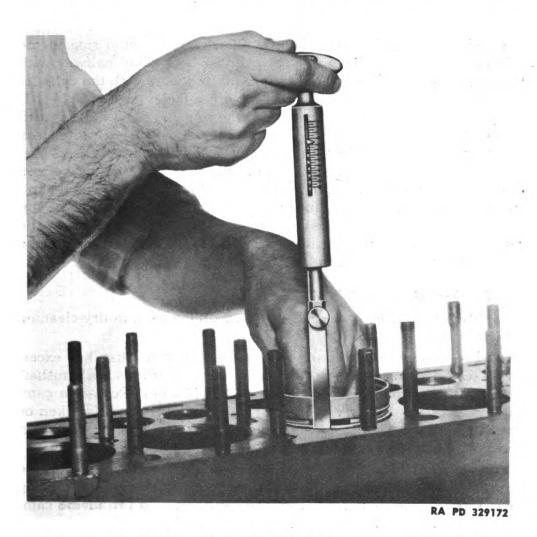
Fitting Piston to Cylinder Bore Using Scale With Feelers (41-S-498)
